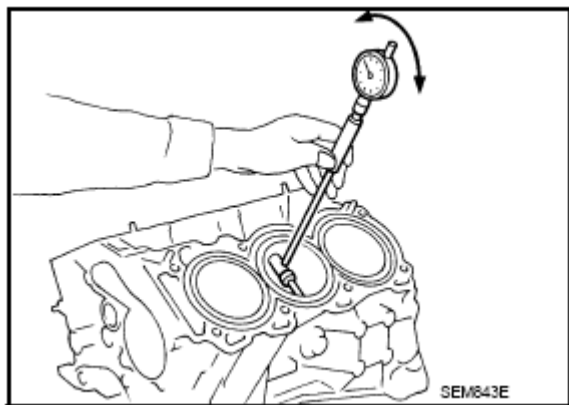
Checking Clearance Of Piston-To-Cylinder Bore Using Bore Gauge
